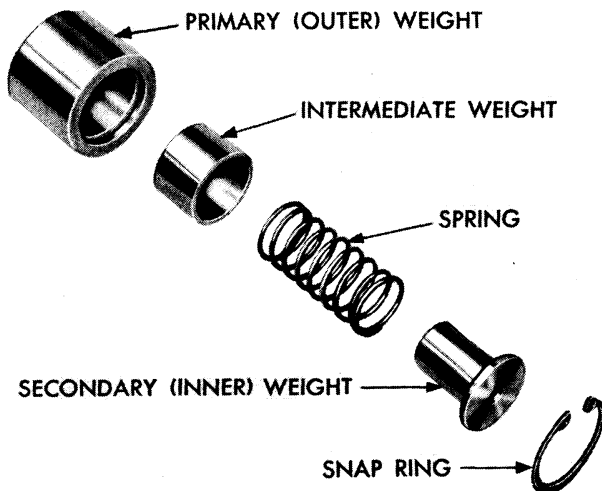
3-Stage Governor Weight Assembly (Disassembled View)
